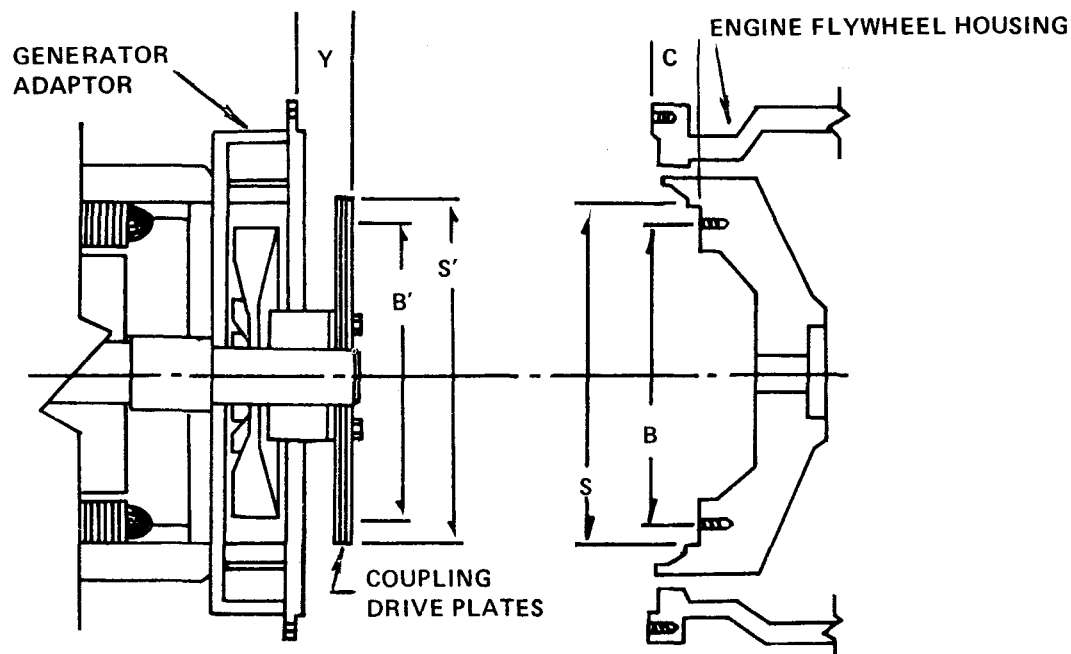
ENGINE AND GENERATOR COUPLING DIMENSIONS
